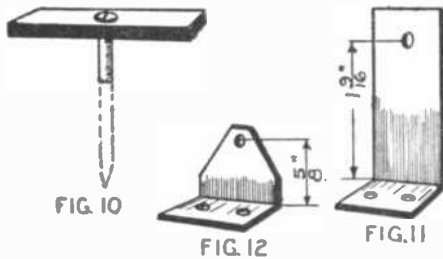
A retaining strap to hold the field coils in place. Figs. 11 and 12: Bearings supporting the armature shaft. None of the usual bearing troubles will be involved in the use of the bearings shown here.
